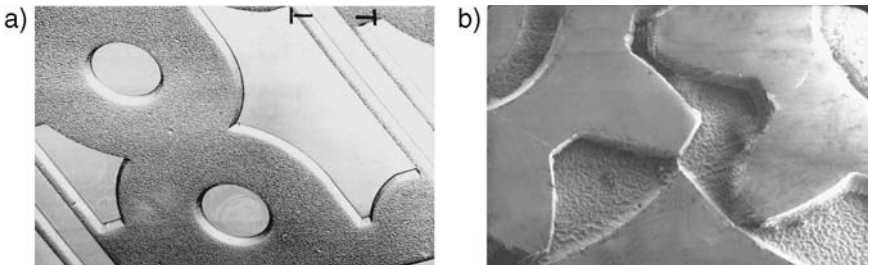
Silicon micro gear: a) body after dry etching, b) completed mechanism.
